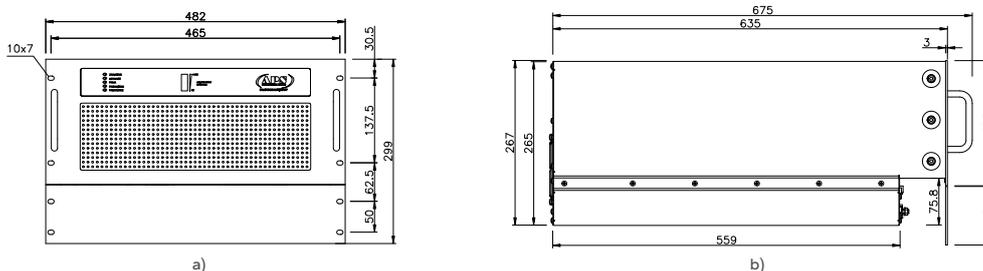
Views with dimensions of the FATz / FAT MC type drive inverter: a) front view in the M5 enclosure; b) left-side view in the M5 enclosure.
